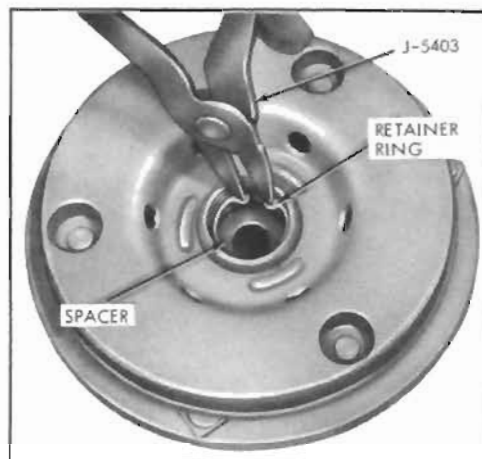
Removing or Installing Retainer Ring in Clutch Drive Plate
